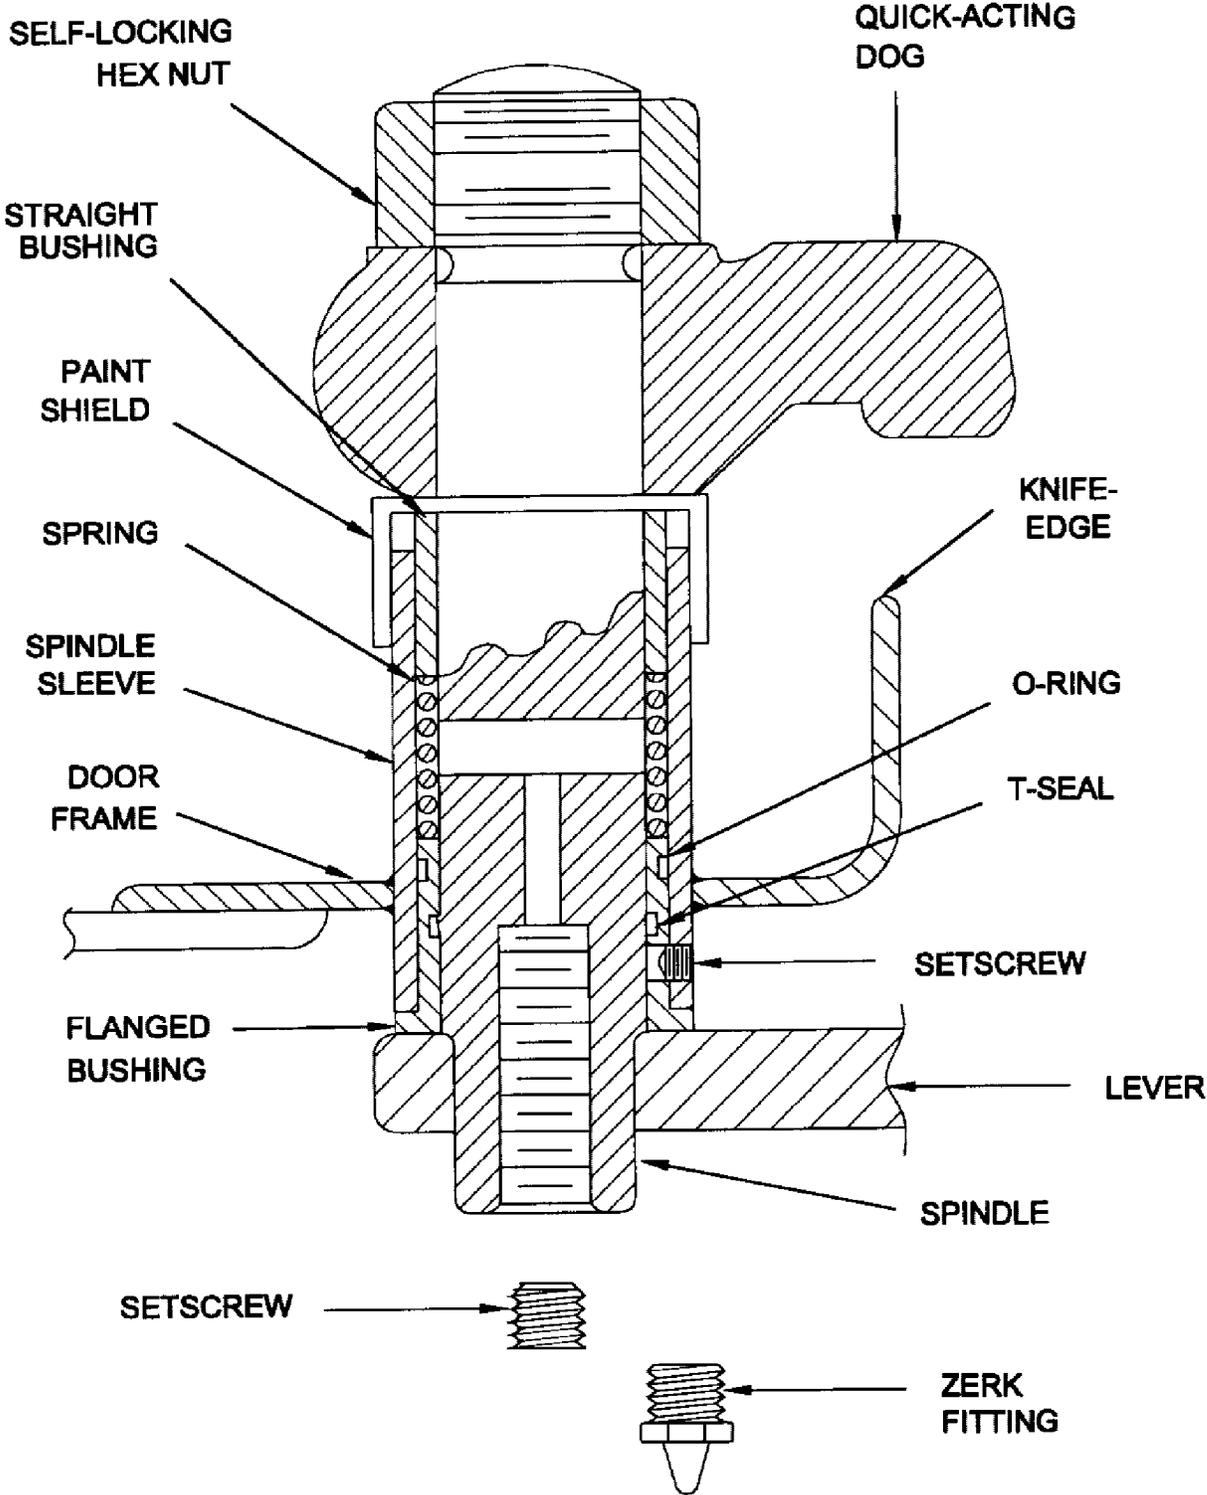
Quick-Acting Door Dog Assembly (Cross Section View) Modified by MACHALT 167-31010 (ECP-526)
